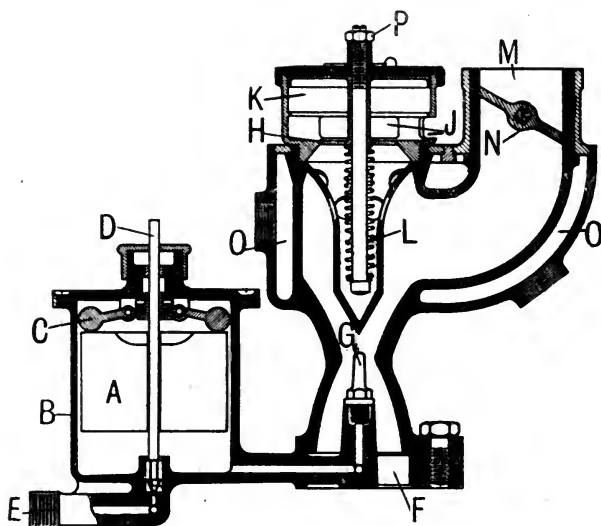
SECTION OF AUTOMATIC CARBURETTER.
